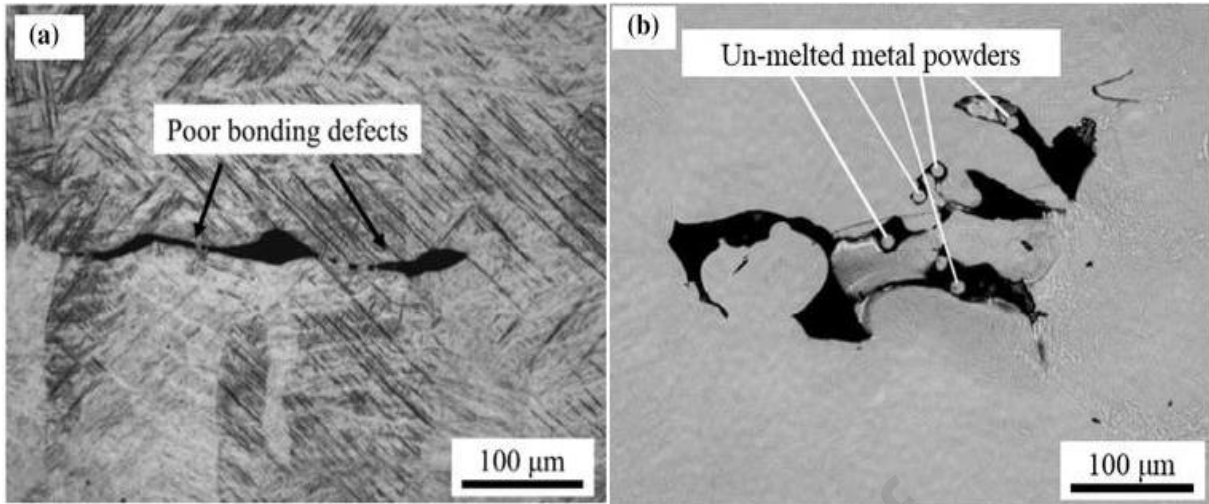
(a) Poor bonding defects and (b) unmelted metal powder defects in a SLM-produced part [90].
